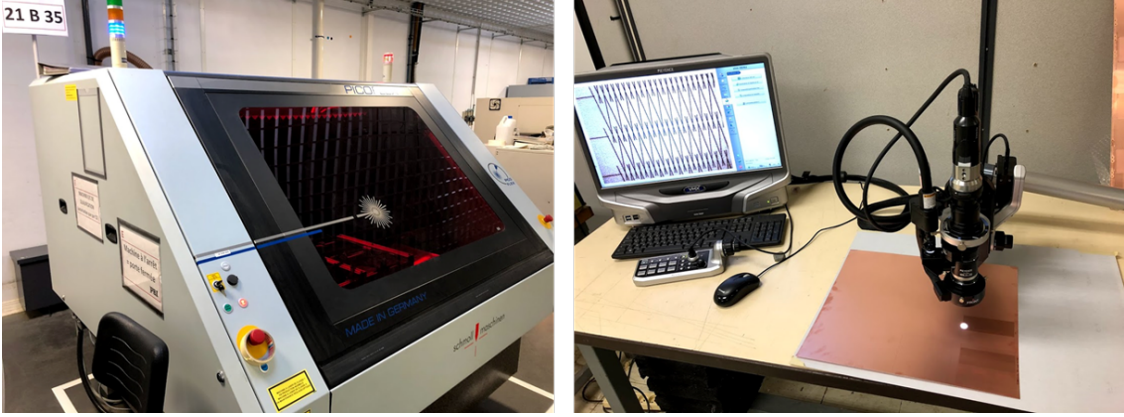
Photo of the laser ablation machine at Elvia in Coutances, France and the microscopic inspection of a laser etched PCB sample.
